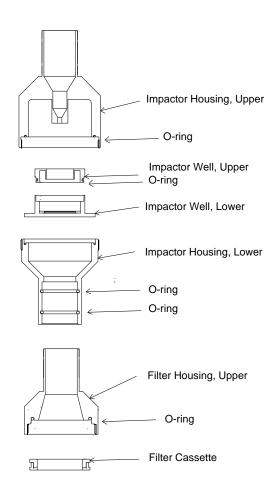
Exploded cross-sectional view of design of PM_{2.5} impactor well and filter holder.
